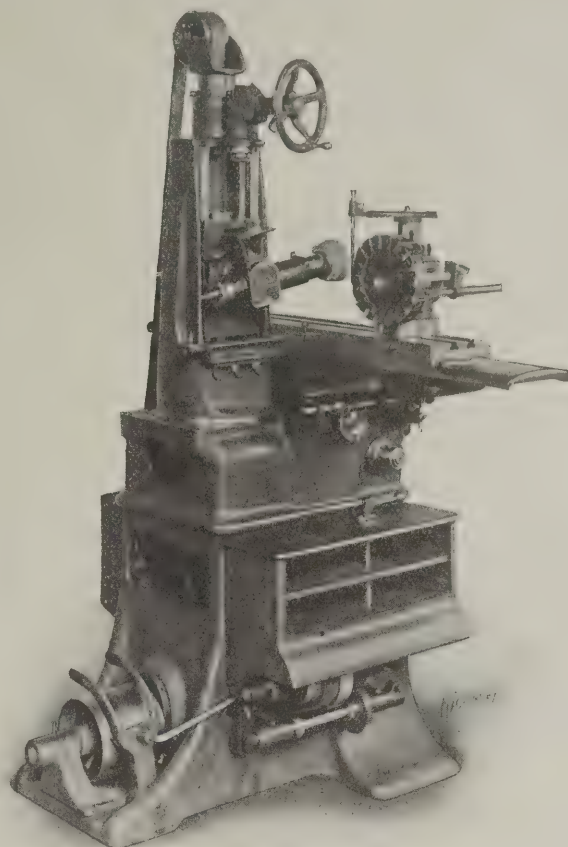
Grinding an Inserted-tooth Cutter on Walker Grinder
